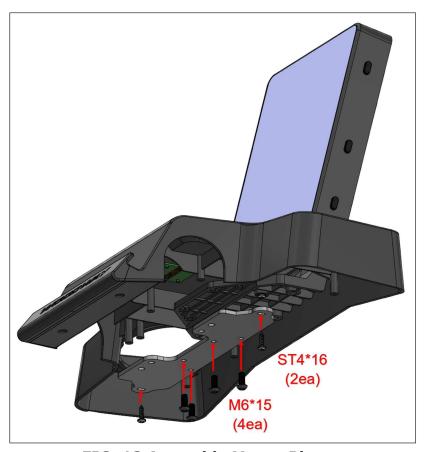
Assemble Mount Plate w/fasteners to Display Support
